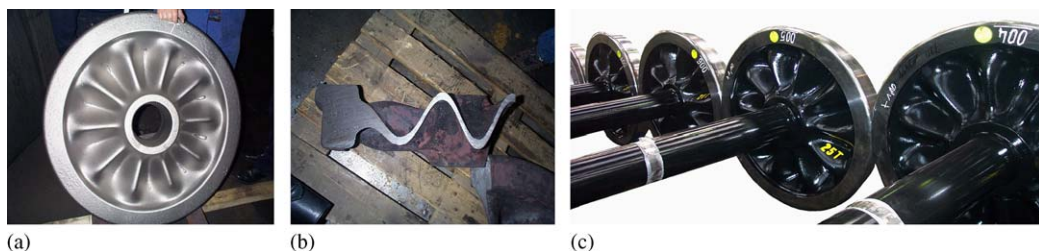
Low-noise prototype freight wagon wheel for block-braked operation ((a) side view and (b) horizontal cut through the wheel and (c) full wheel set ready for assembly).
